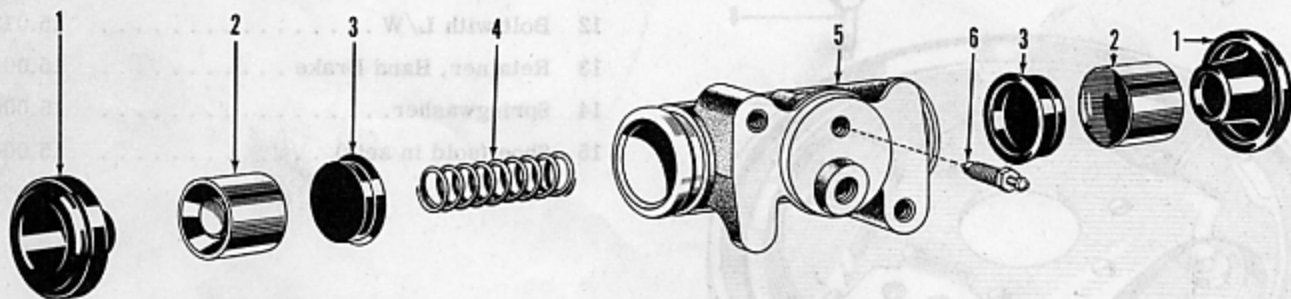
TYPICAL REAR WHEEL BRAKE CYLINDER - EXPLODED VIEW
